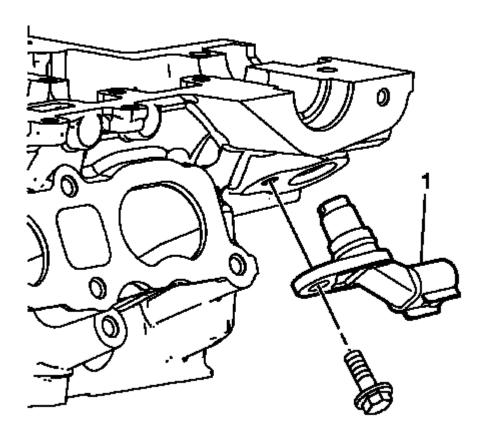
Intake Camshaft Position Sensor Courtesy of GENERAL MOTORS COMPANY
